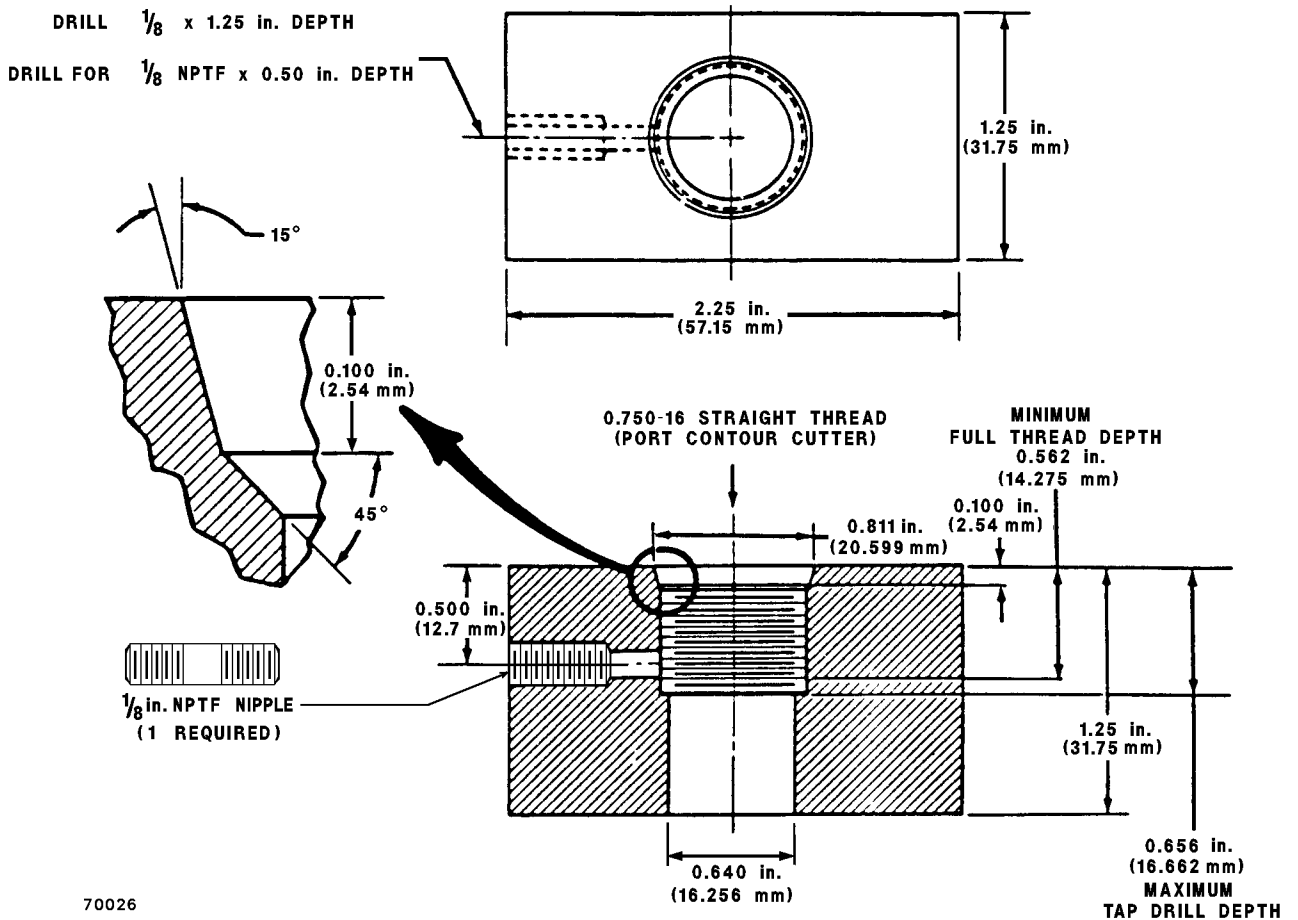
INDICATOR SWITCH PRESSURE TEST BLOCK
